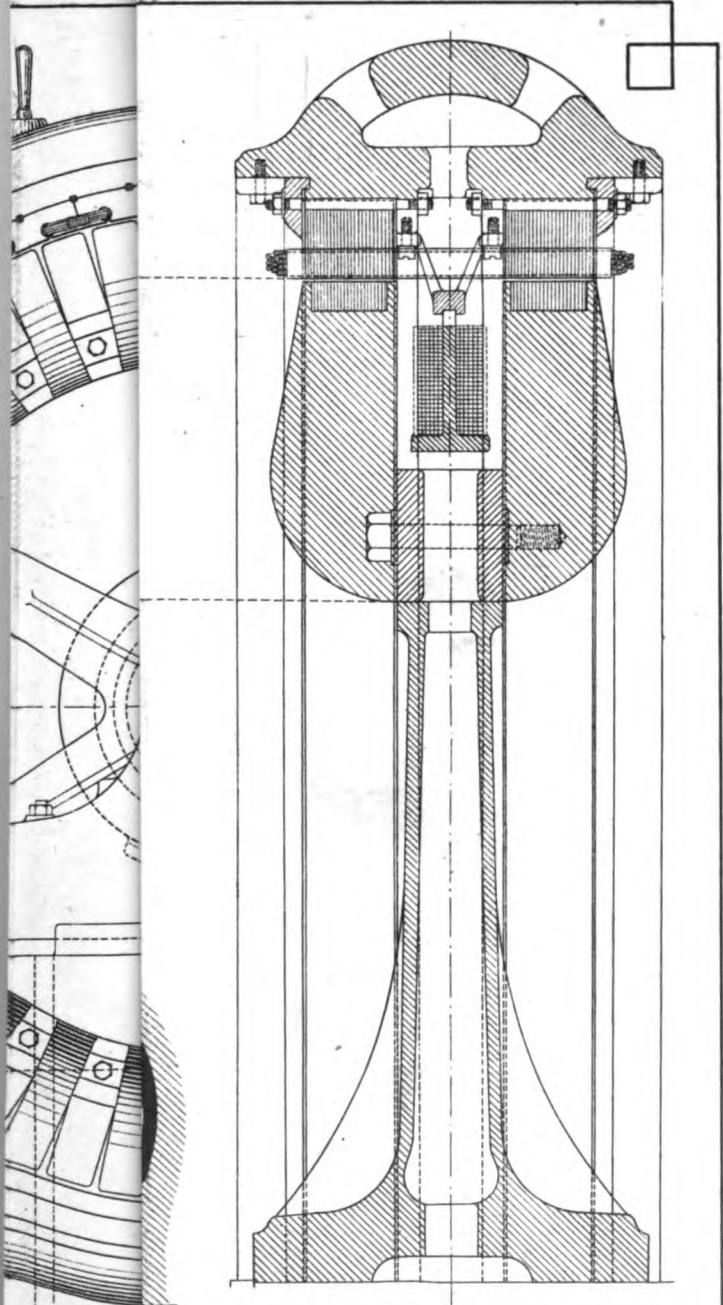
DETAILS OF RHEINFELDEN MACHINE.
